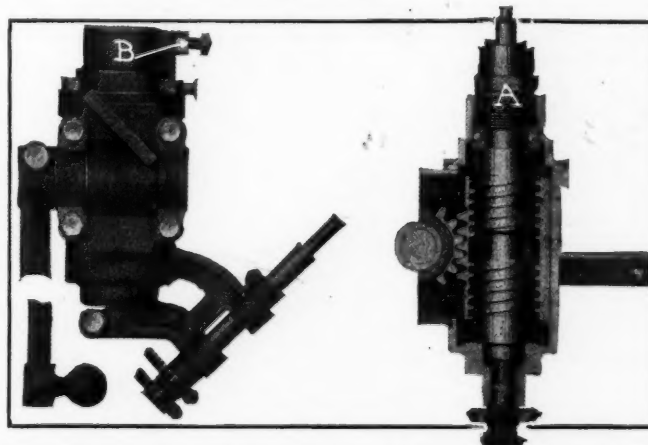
Buick steering gear, showing adjusting nut at A and locking screw at B.
